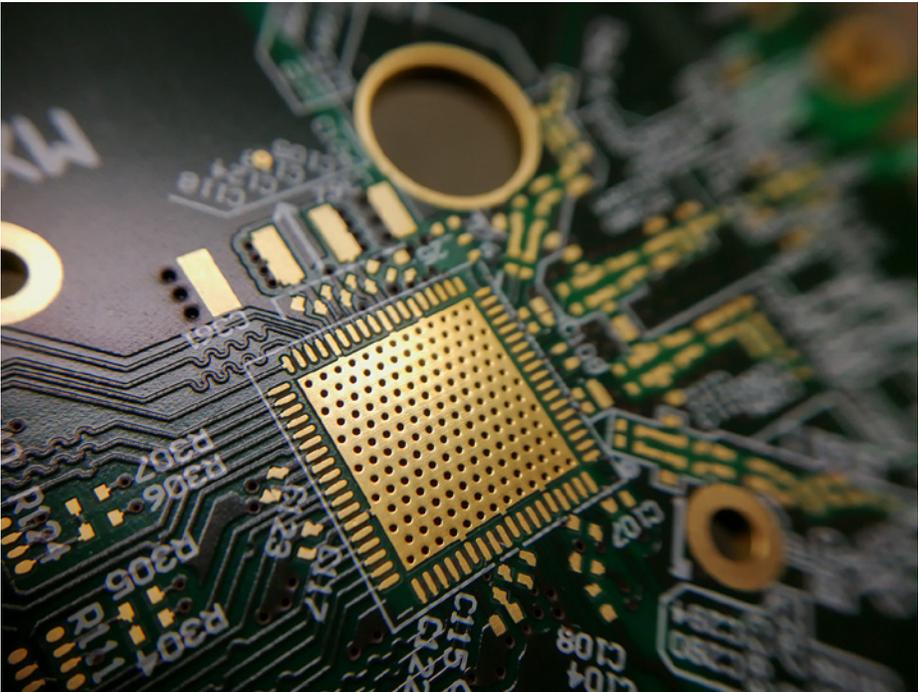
A QFN package with PCB thermal vias to assist with heat dissipation.
